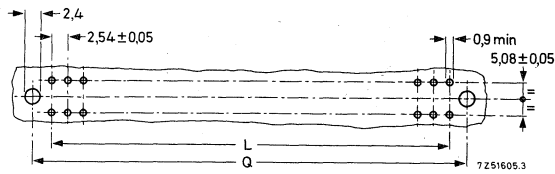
Hole pattern for board mounting of male parts; see Table 4 for dimensions L and Q.
